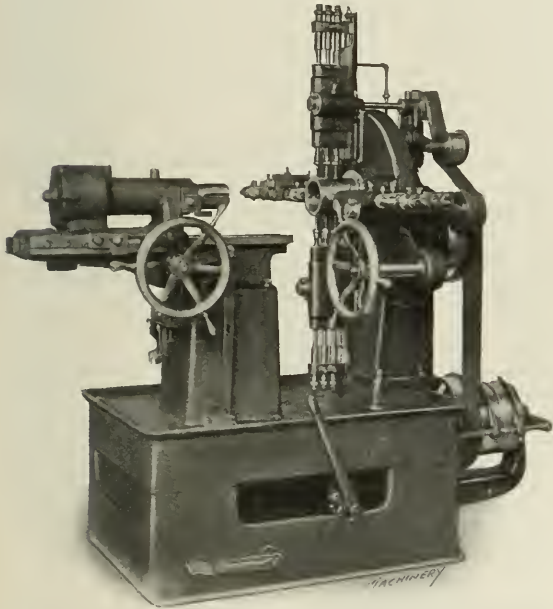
Langelier Multiple-spindle Machine for drilling Motor Valve Sleeves
